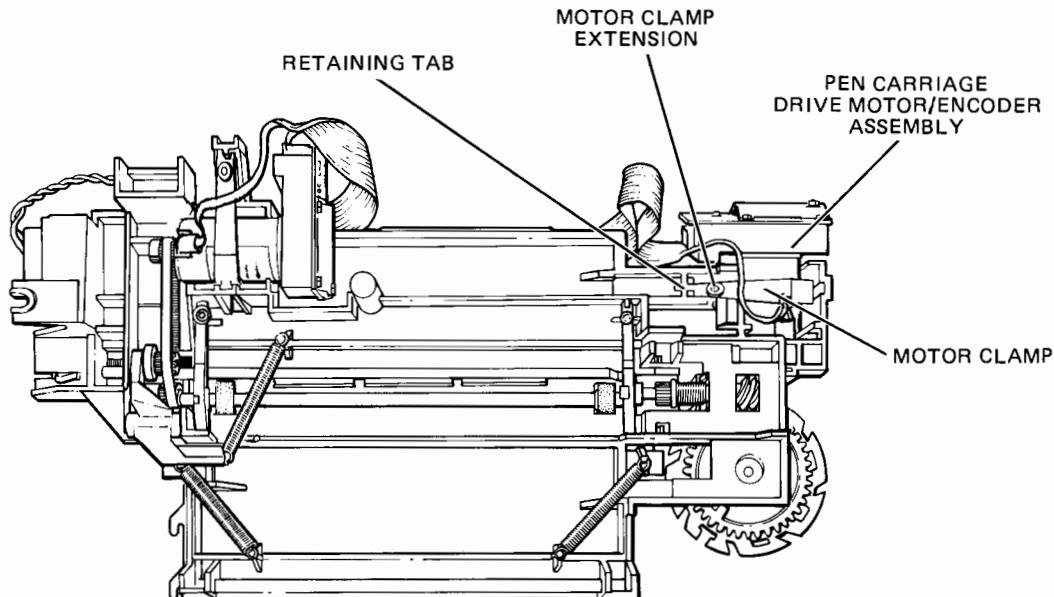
Pen Carriage Drive Motor/Encoder Assembly Removal, Detail C
